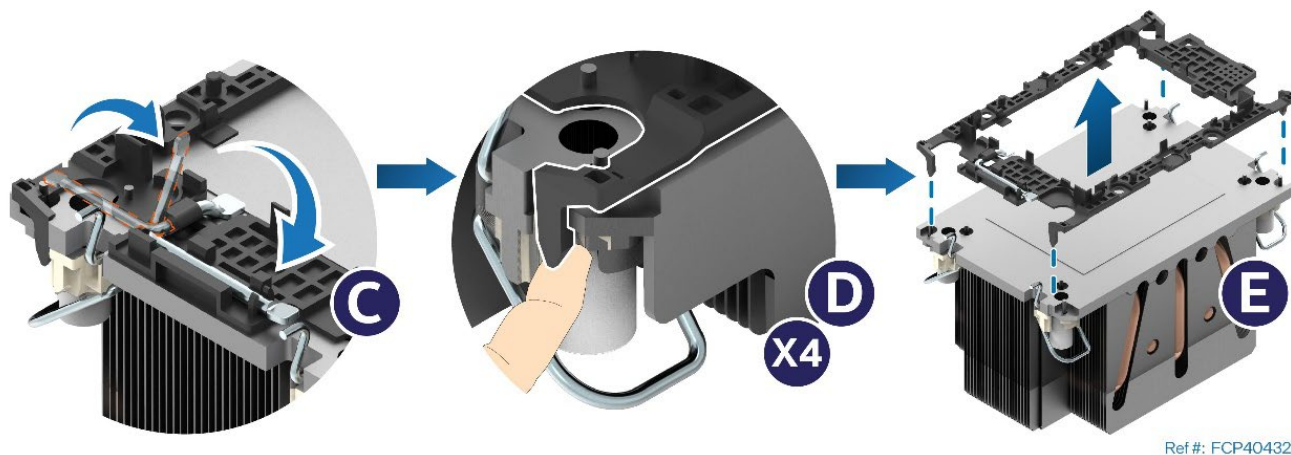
Processor Carrier Clip Removal from PHM Assembly
